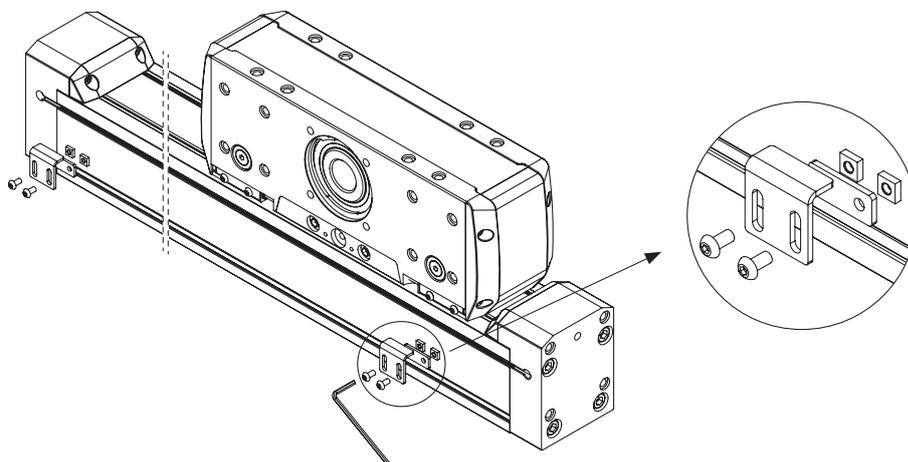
Mounting the damping elements – HC025B and HC040B (with spacer plate)
